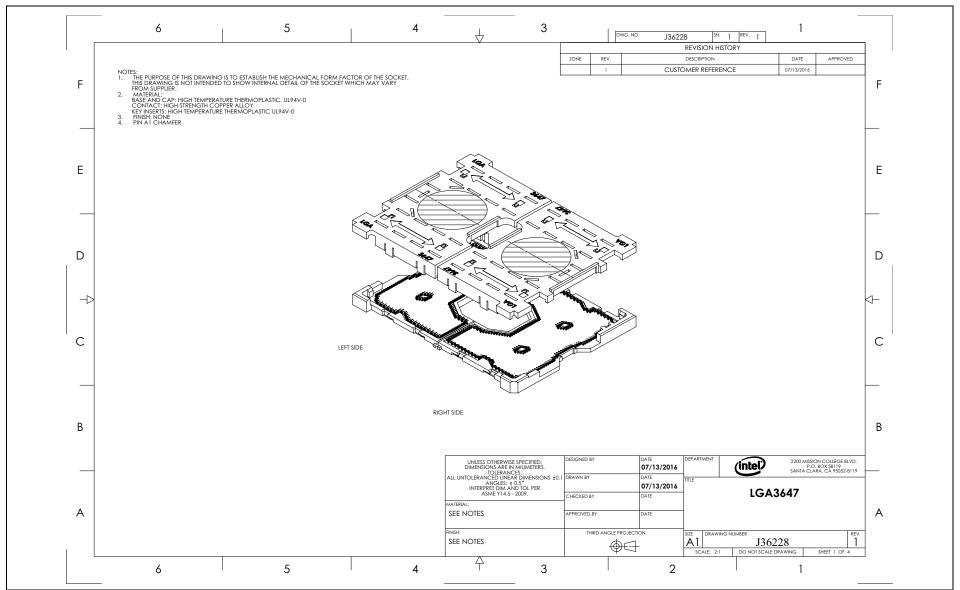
Socket Mechanical Drawing (Sheet 2 of 4)
